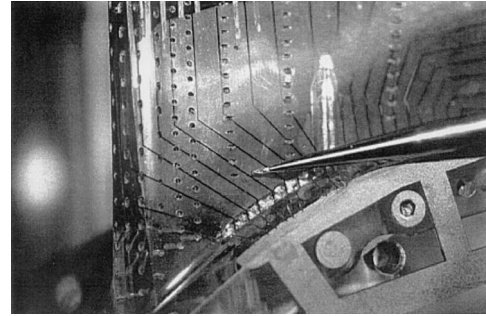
Drilling of the film cooling holes through the polyimide sheet (the drill bit is shown approaching from the right).
